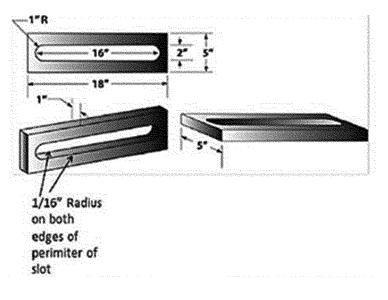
Crib Bumper/Liner Thickness Test Fixture
